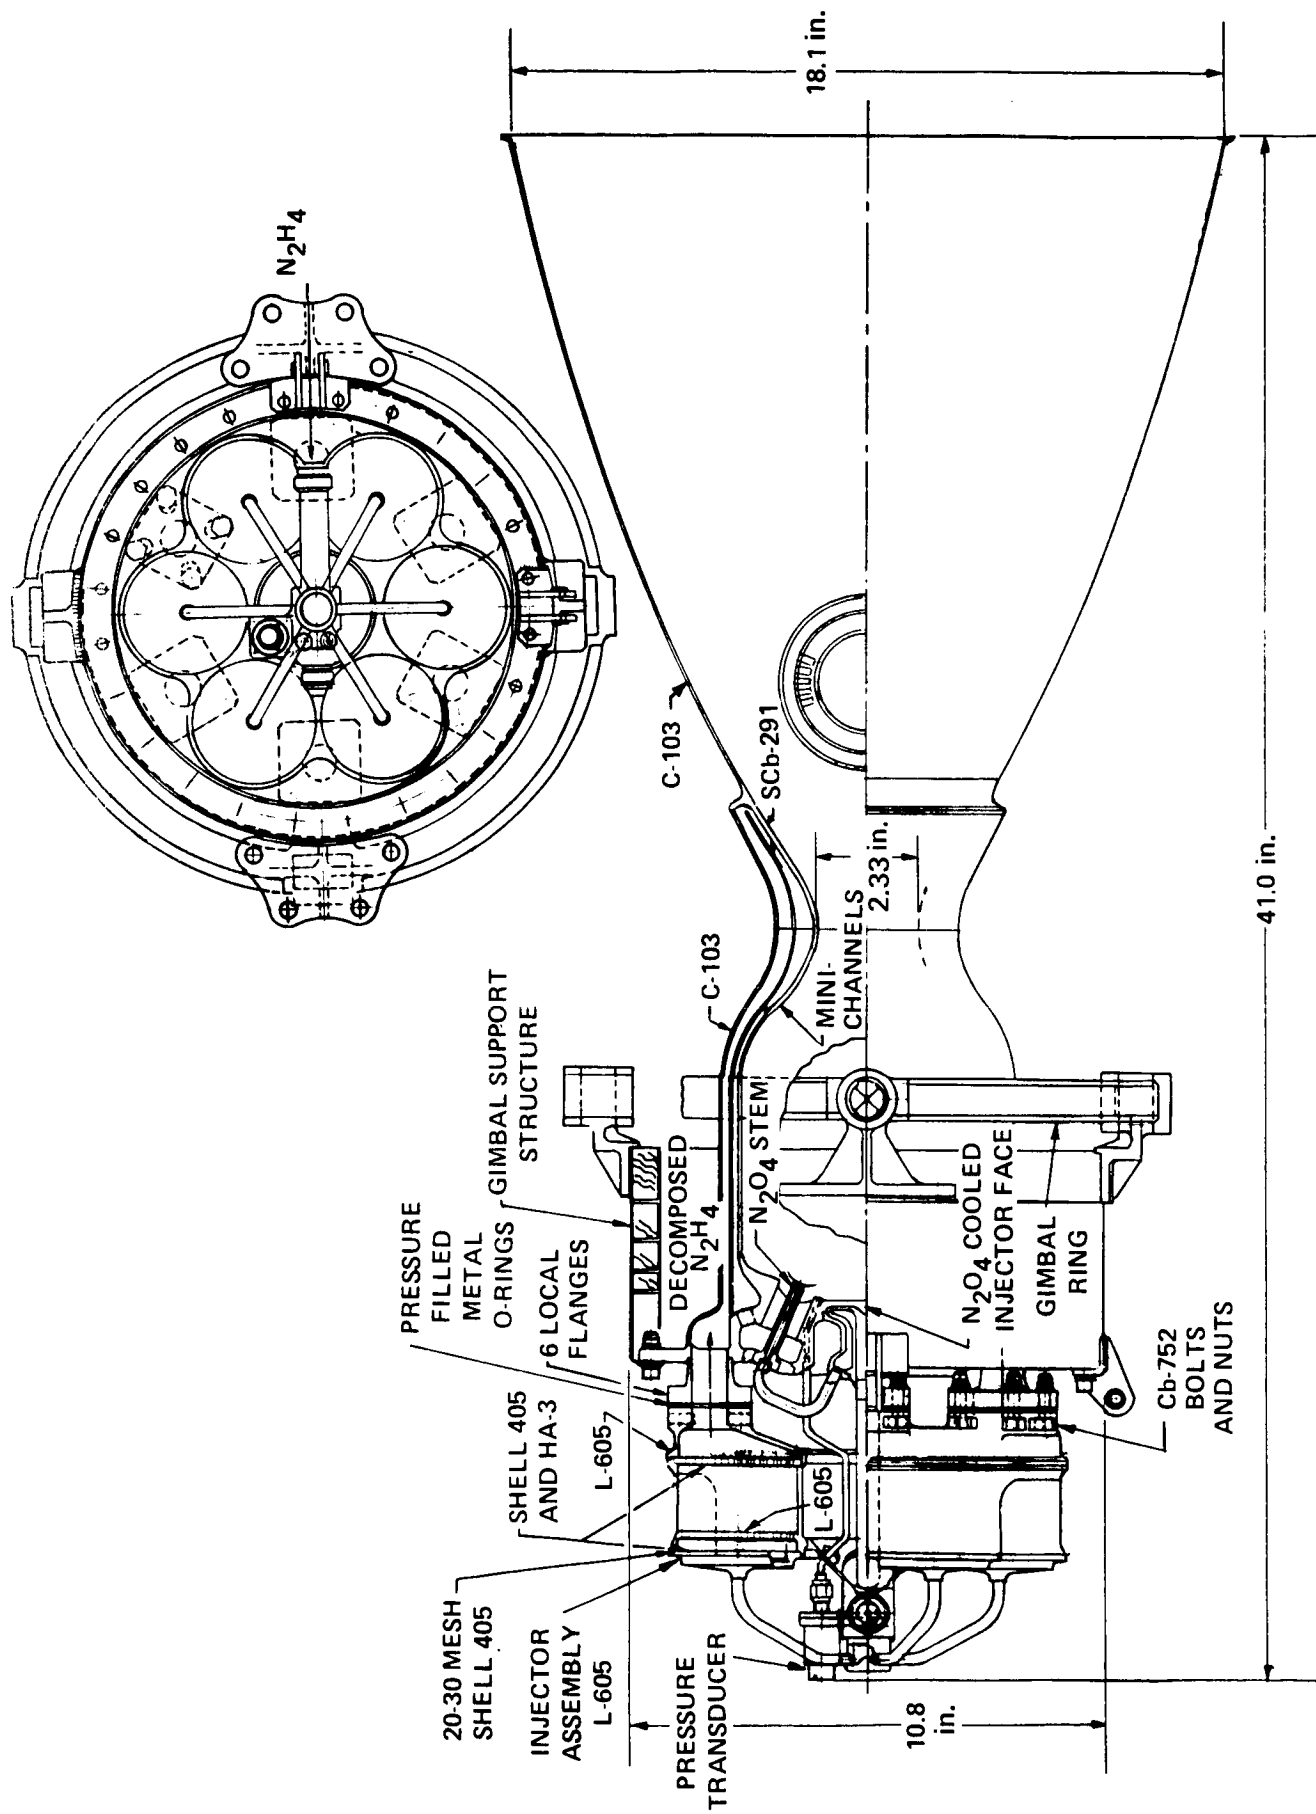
SL. Prototype Regenerative Cooled Bimodal Thrust Chamber with Integral Six Cylindrical Reactor at Injector
